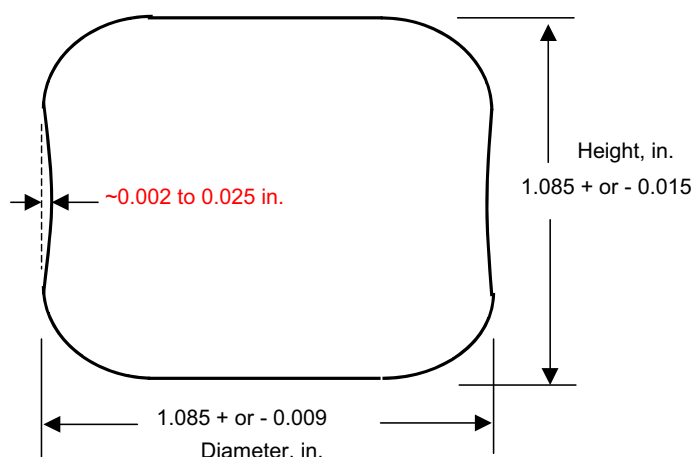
Dimensions of a sintered GPHS pellet with the expected taper resulting from pressing and pressureless sintering.
